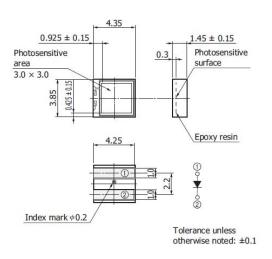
Hamamatsu S12572 MPPC surface mount package dimensions.
